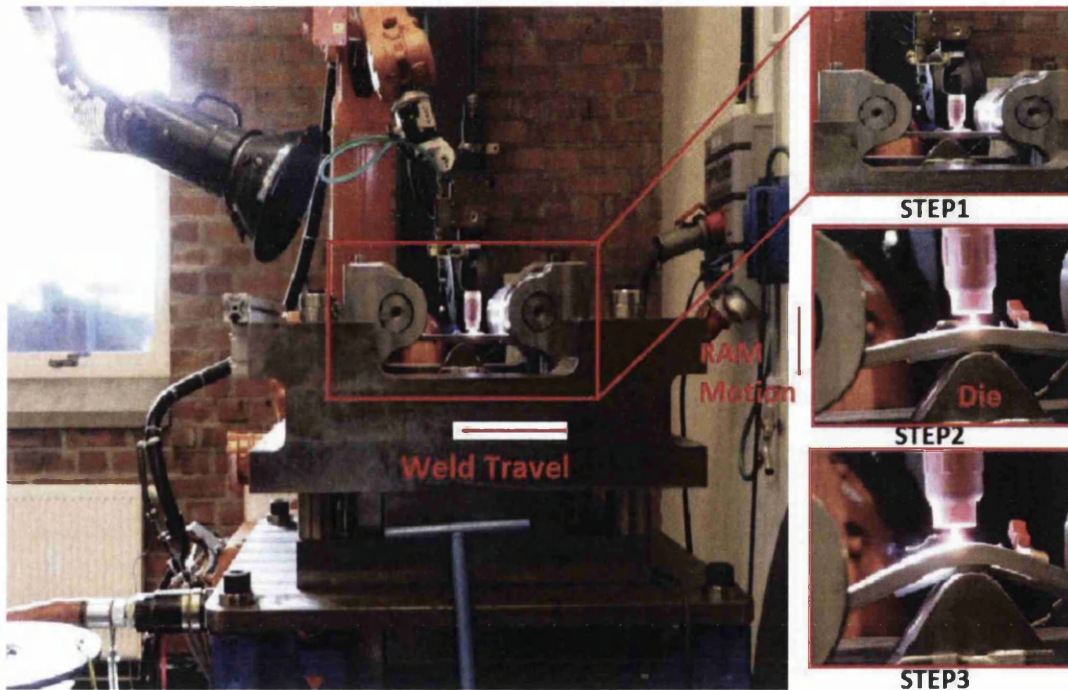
shows the Weldability testing machine and close view of Vareststraint test steps.
